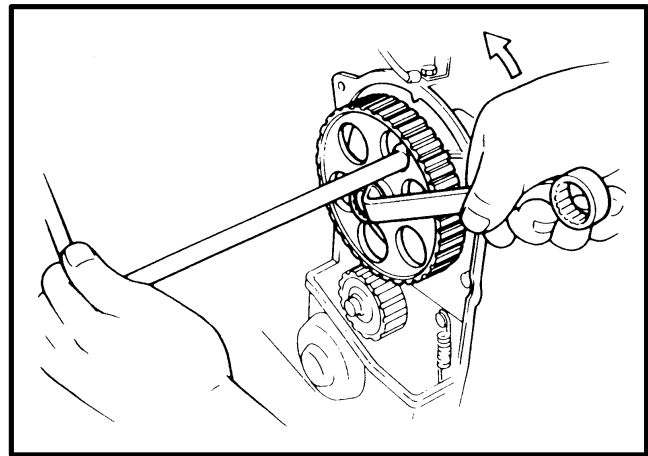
REMOVE THE CAMSHAFT GEAR
